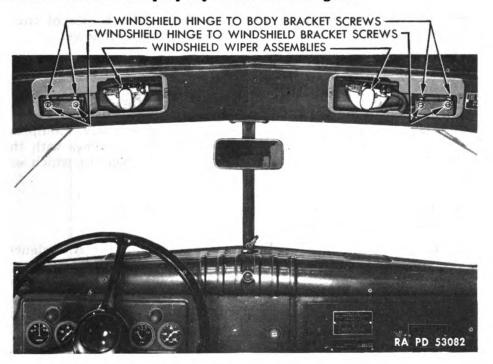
Windshield Hinge and Wiper Location (Closed Bodies)
